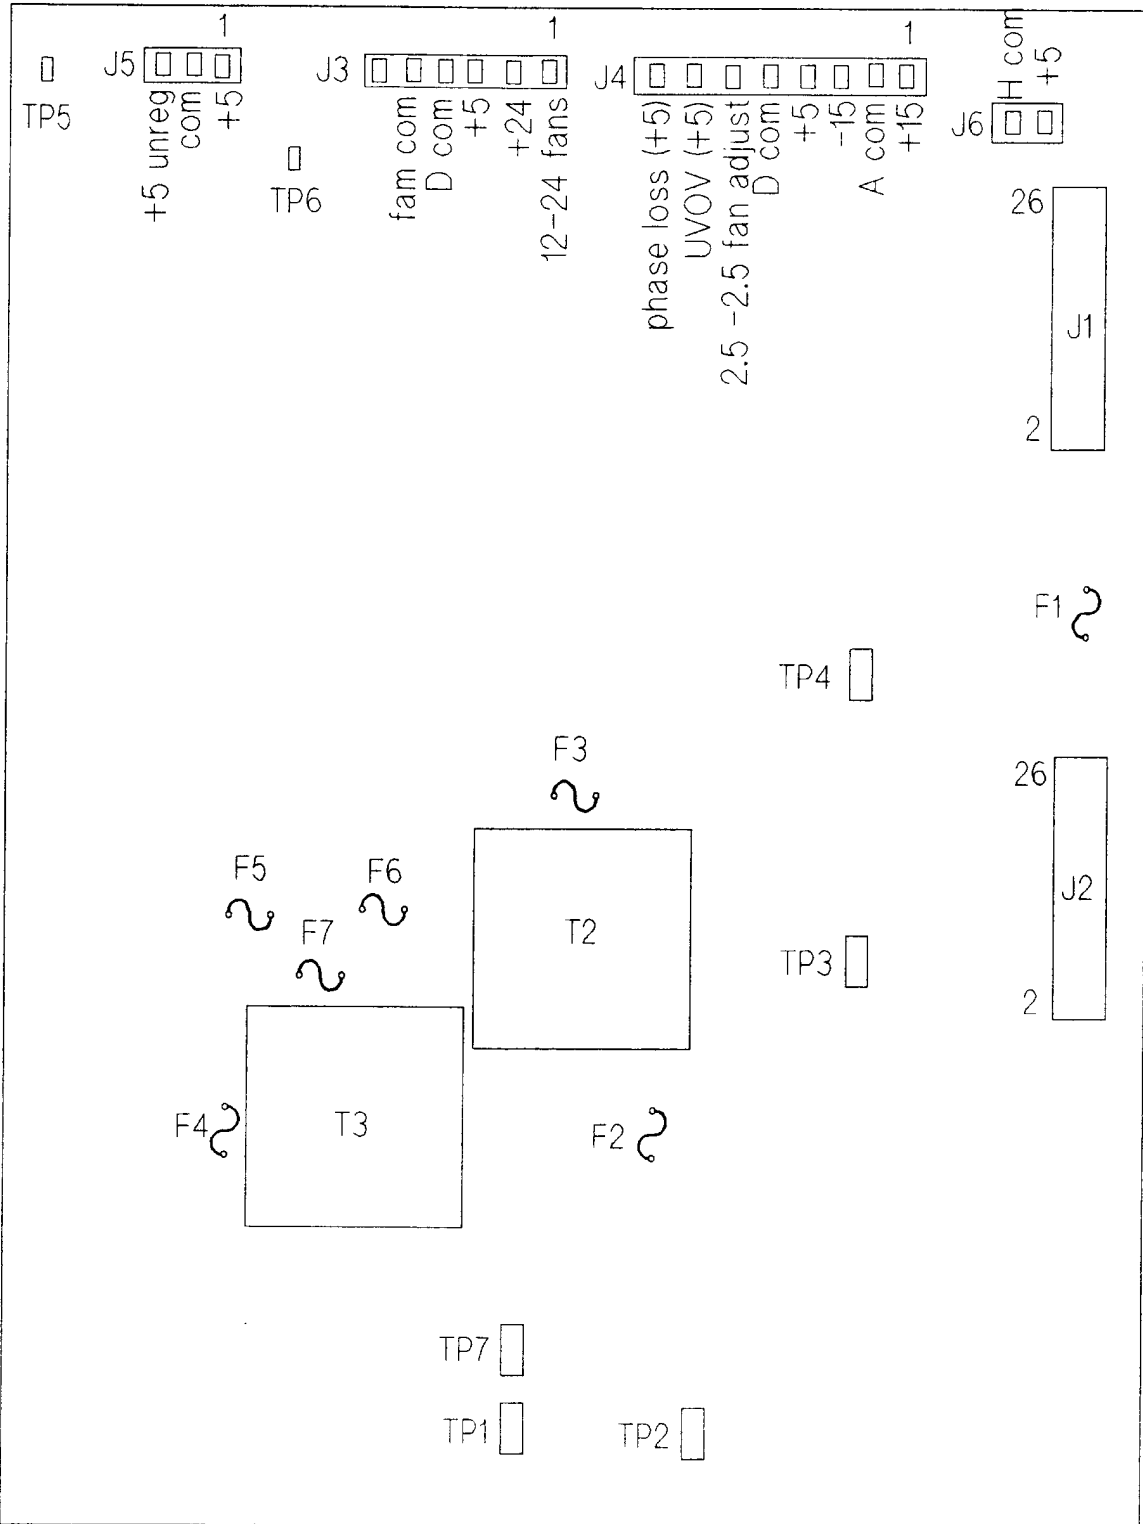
A10 Auxiliary Power Supply Board Parts Location
